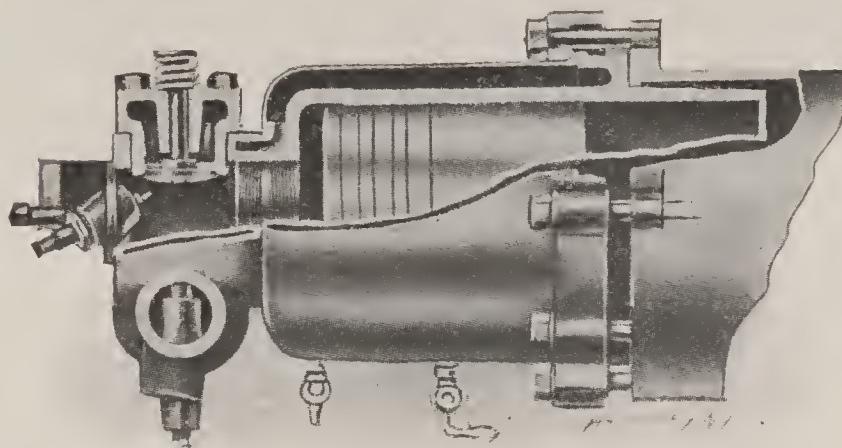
Section through Cylinder showing the Water Jacket Construction
